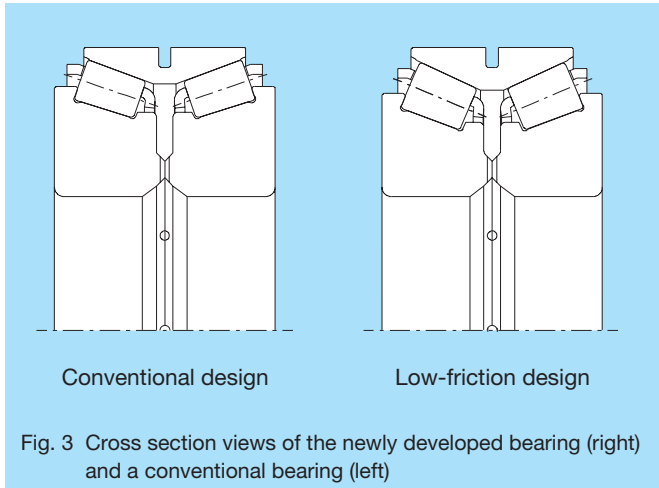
Cross section views of the newly developed bearing (right) and a conventional bearing (left)
